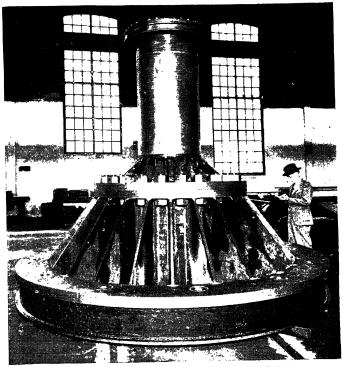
Assembling unit. (Bethlehem Steel Co.)
